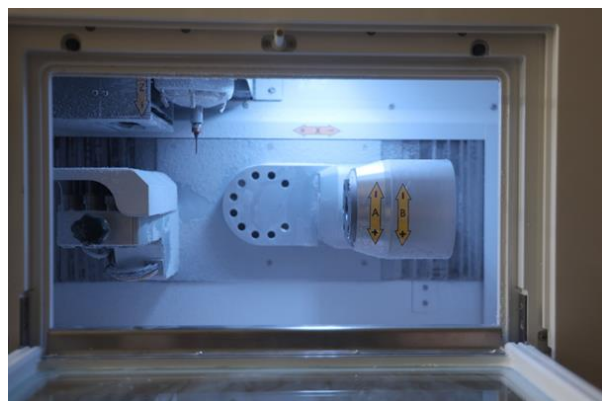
Cortec 350i Imes Icore 5 Axis Milling
